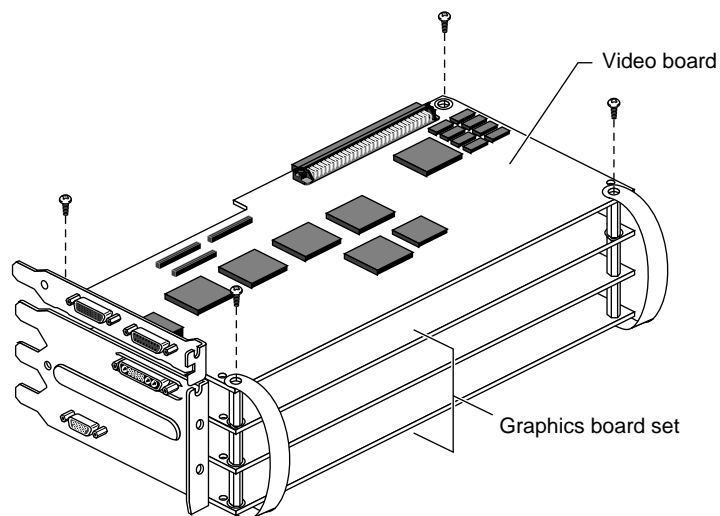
Aligning and Attaching the Video Board to the Graphics Board Set
